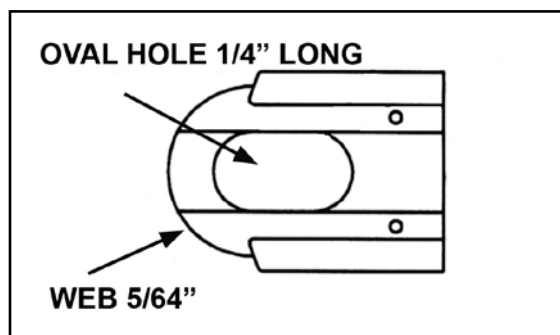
The fixed ejector must be altered to a moving sliding type that should slide free, but without excessive play.
